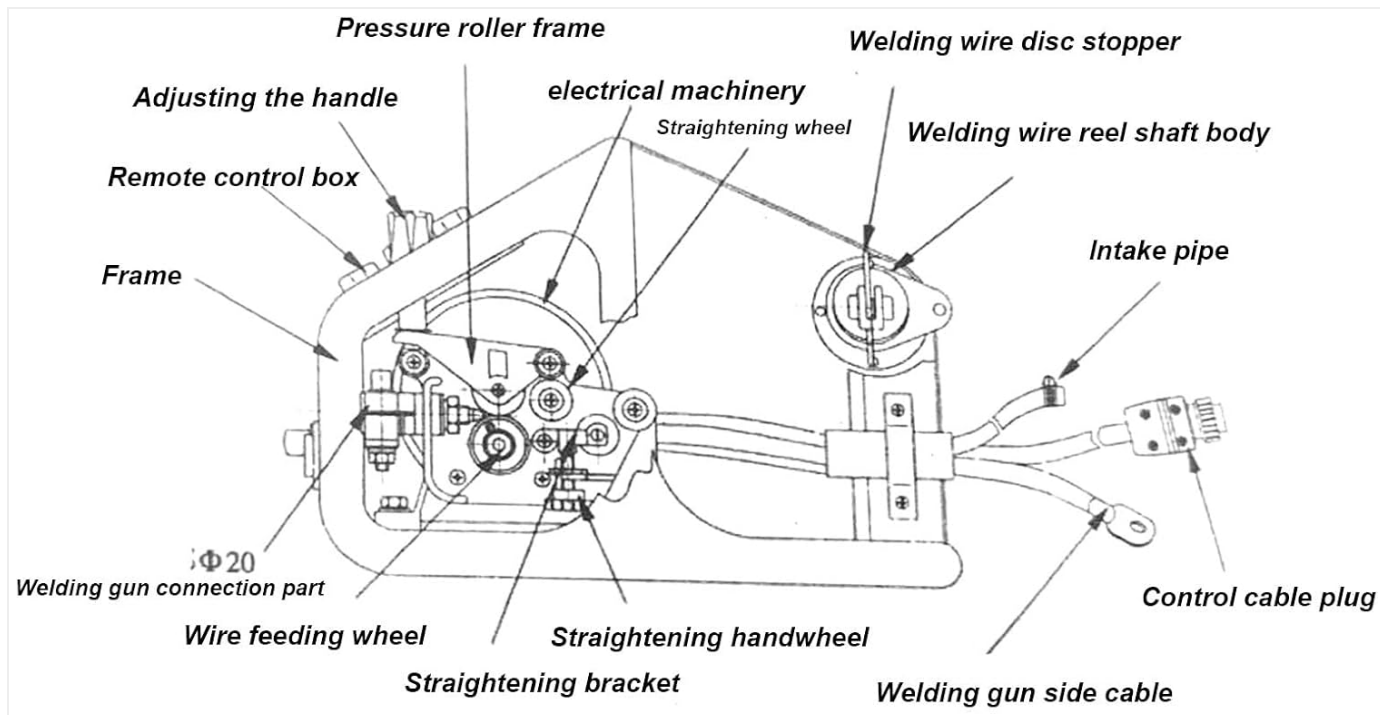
Component diagram of the welding wire feeder. Key parts include the pressure roller frame, welding wire disc stopper, adjusting handle, electrical machinery, straightening wheel, welding wire reel shaft body, intake pipe, remote control box, frame, wire feeding wheel, straightening handwheel, straightening bracket, welding gun connection part, and control cable plug.
